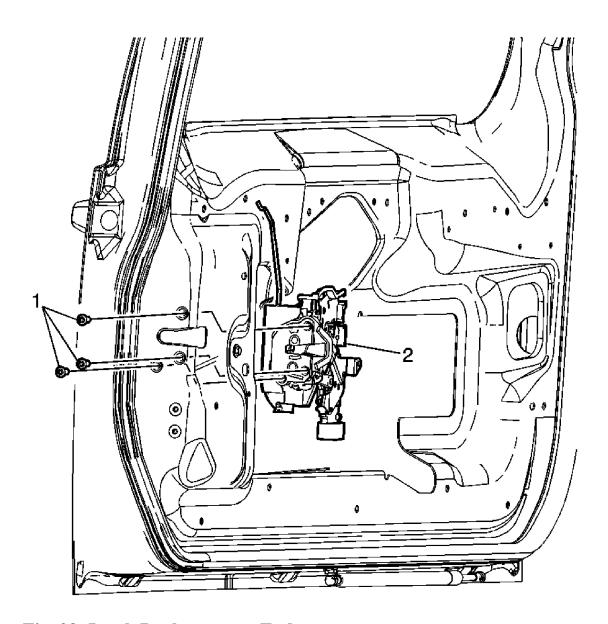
Latch Replacement - Endgate Courtesy of GENERAL MOTORS CORP.
